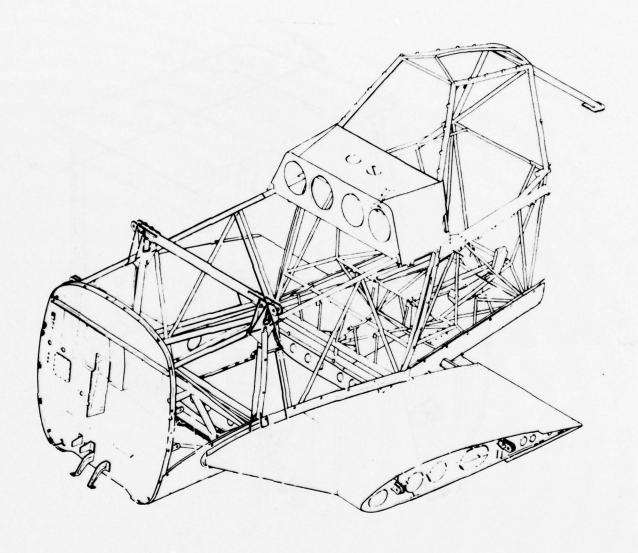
Welded Tubular Fuselage Structure
